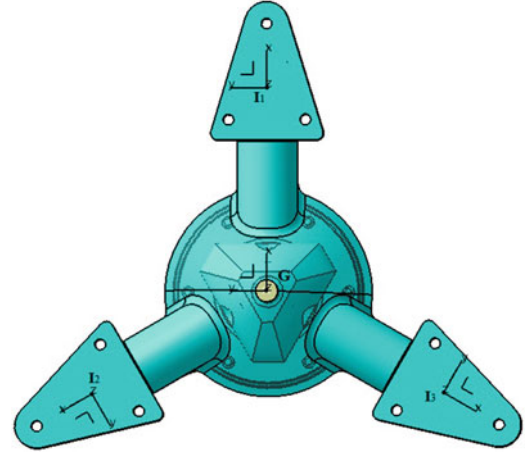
Ampair 600 W rotor assembly measurement (truth model)
